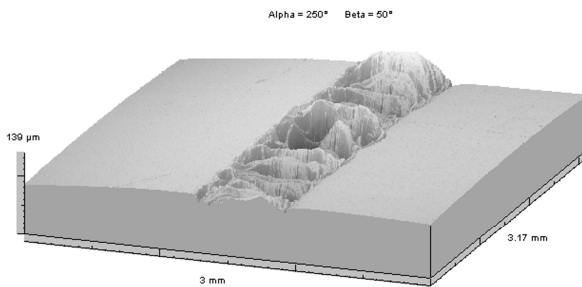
The image of steel weld made by pulsed laser.
